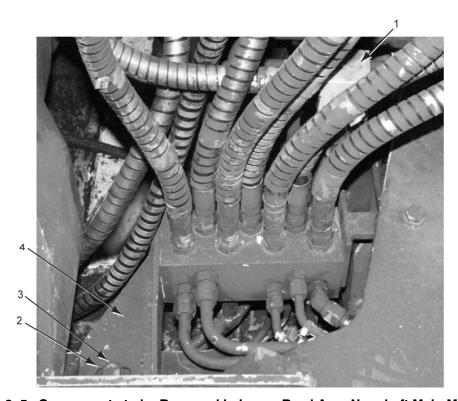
Components to be Removed in Lower Bowl Area Near Left Main Manifold
